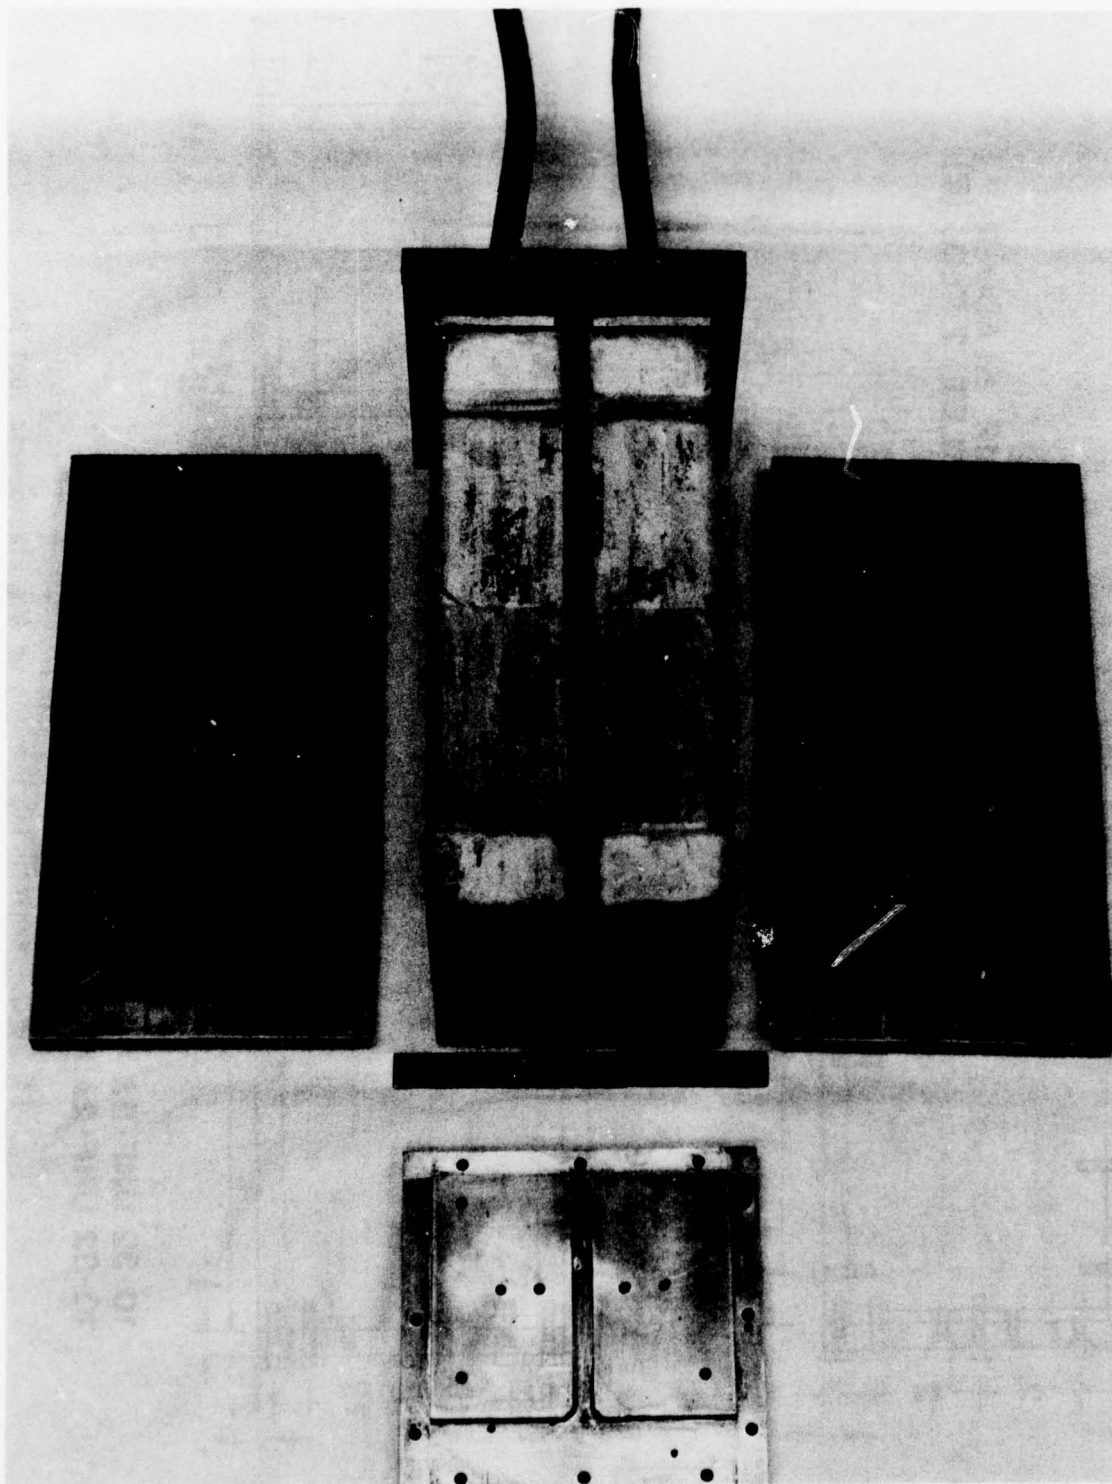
Unassembled Tooling Box Without the Metal Forming Plates
